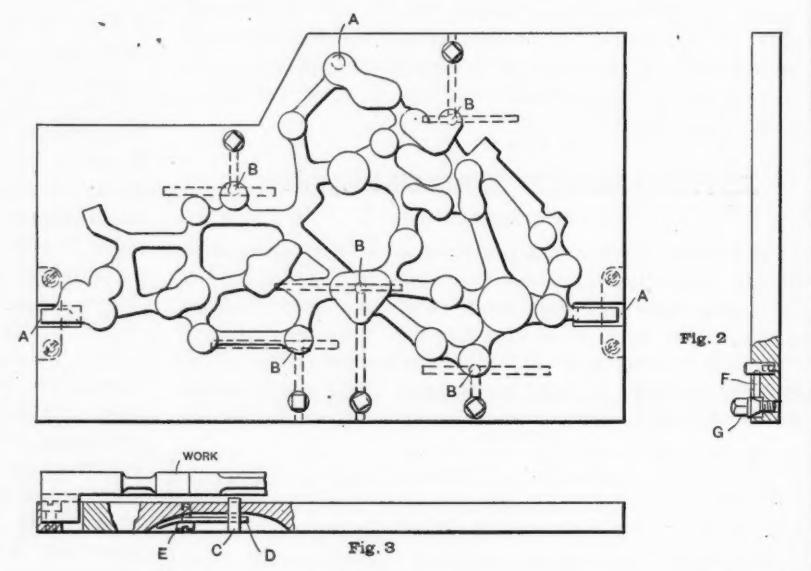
The Fixture used in Finishing Both the Right- and Left-hand Frames to the Desired Thickness
